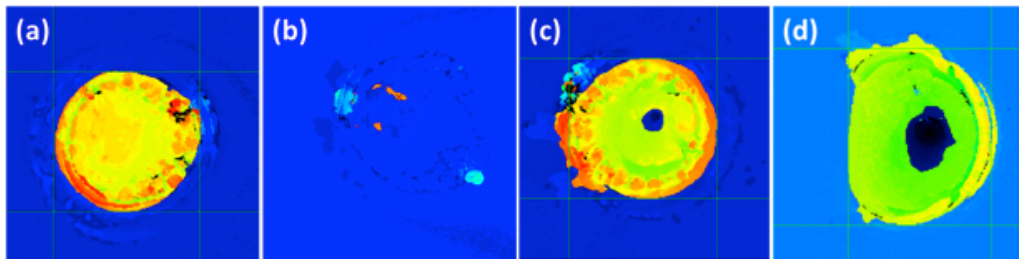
Weld quality attributes as determined by the underwater C-scan ultrasonic method: (a) a good weld, (b) a stuck weld, (c) a weld with center porosity, and (d) a noncircular weld with porosity defect.
